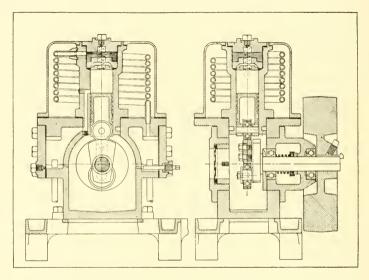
SECTIONAL VIEW OF COOKE REFRIGERATING MACHINE.
